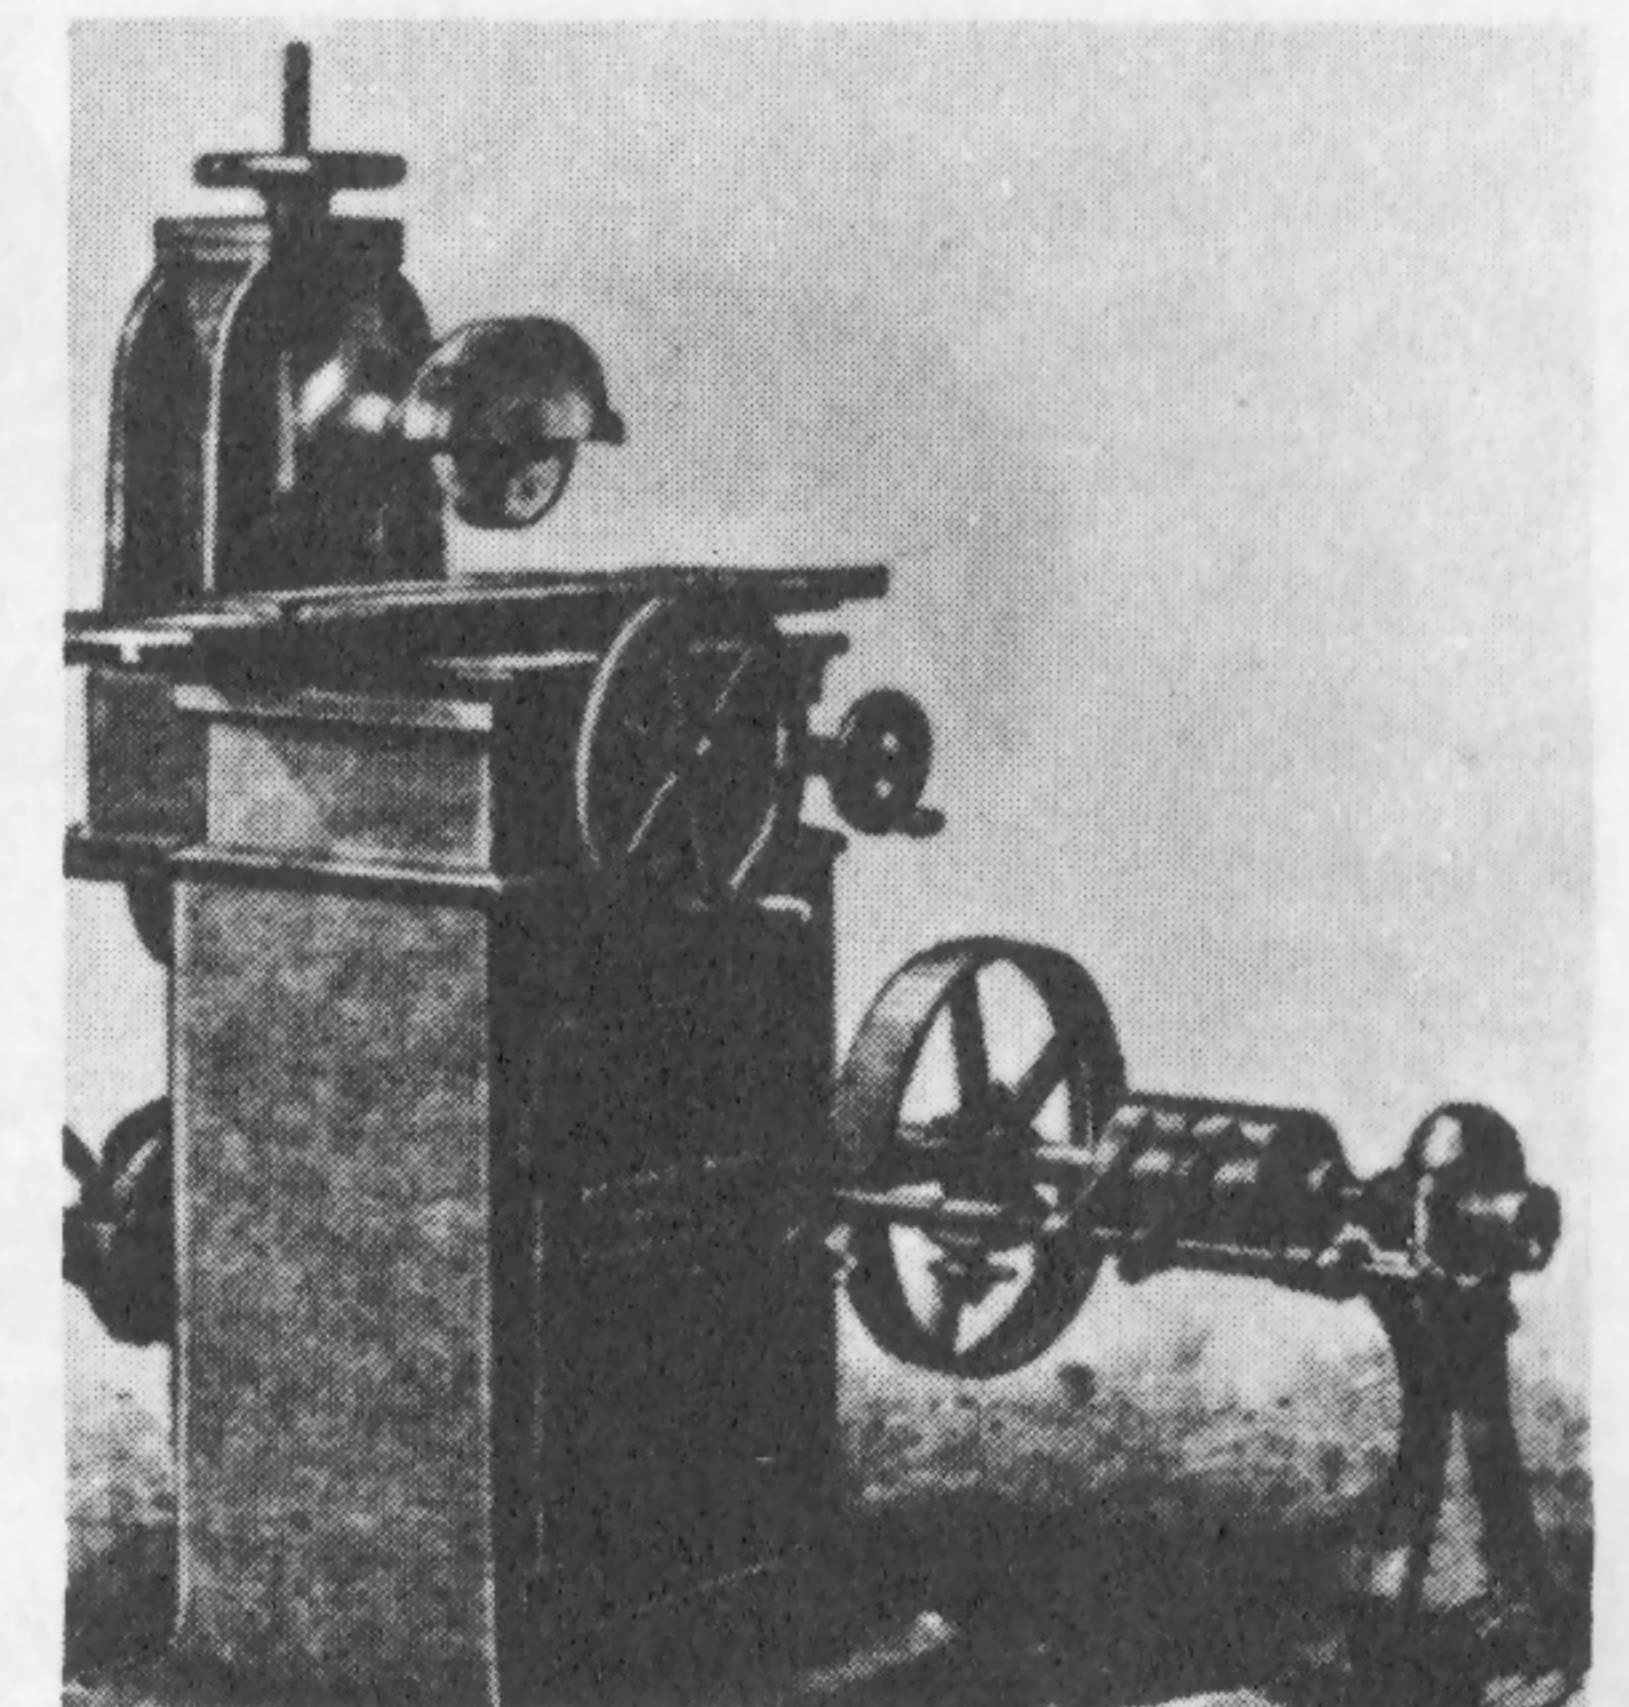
B POST-TYPE SURFACE GRINDING MACHINE, 1883 (Brown & Sharpe)
